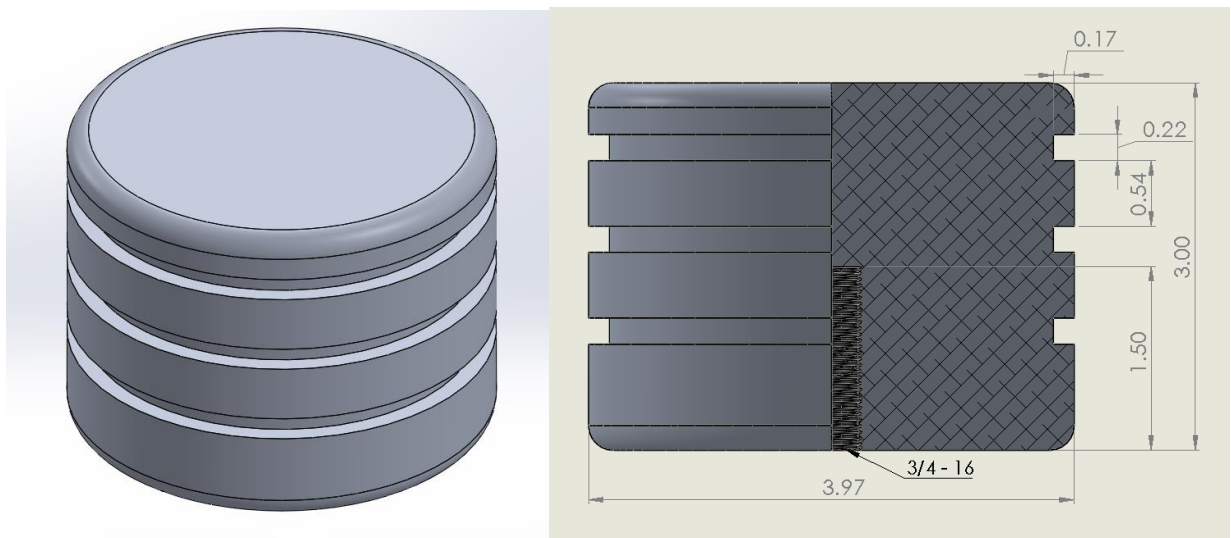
SolidWorks Model (left) and Drawing (right) of Aluminum Piston Head
